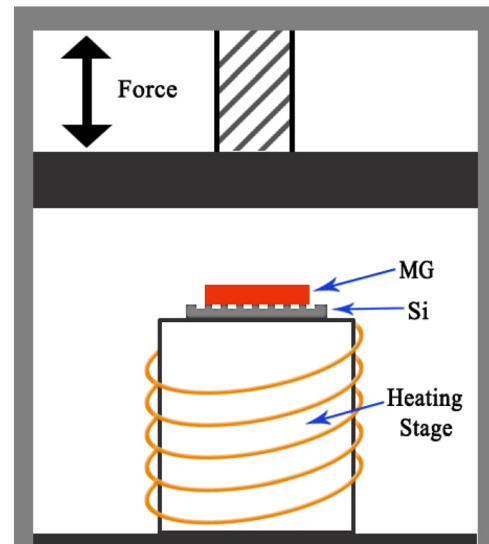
Schematic drawing of the thermoforming process of MG mold insert.
